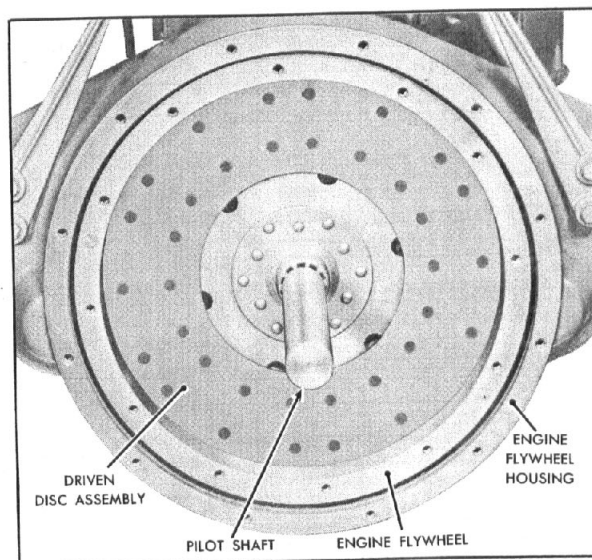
Use of Pilot Shaft in Installing Clutch.
